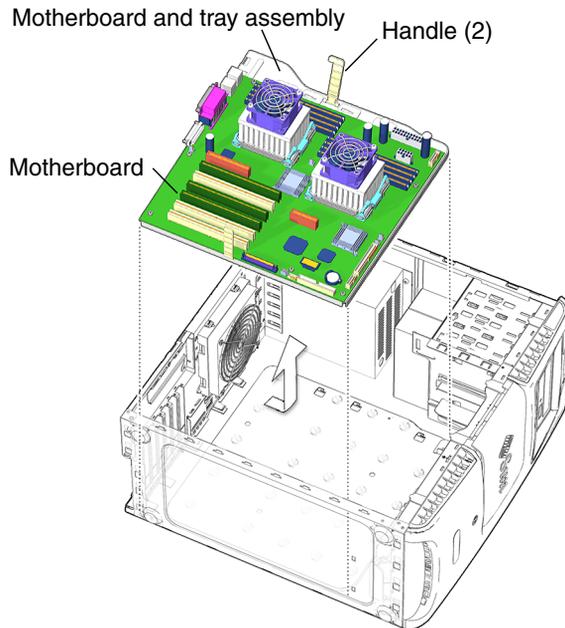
Removing the Motherboard and Tray Assembly
